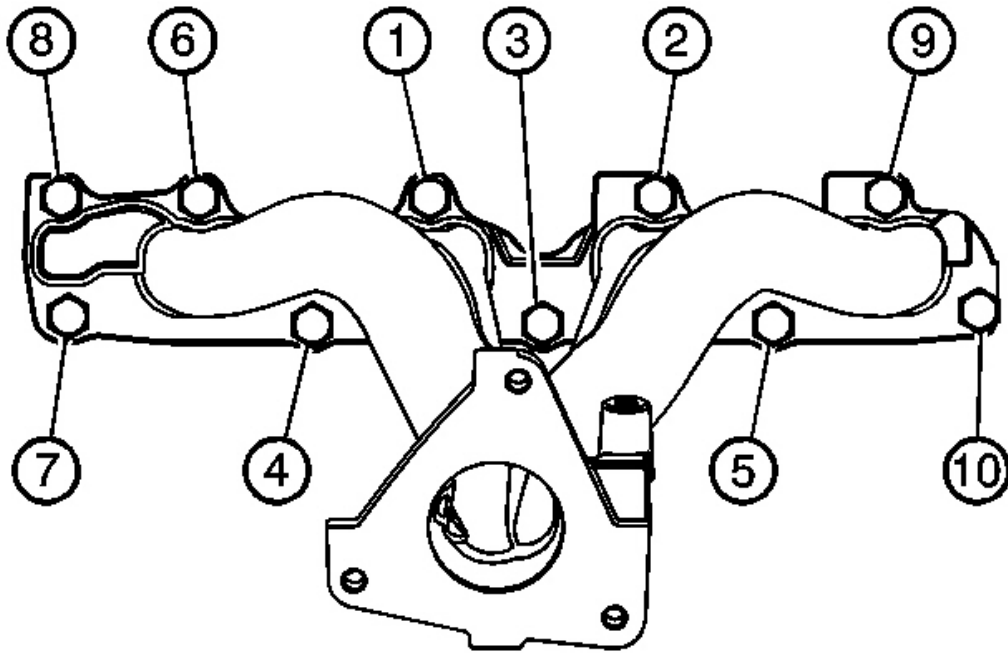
Identifying Cylinder Head Retaining Nuts Fastening Sequence
